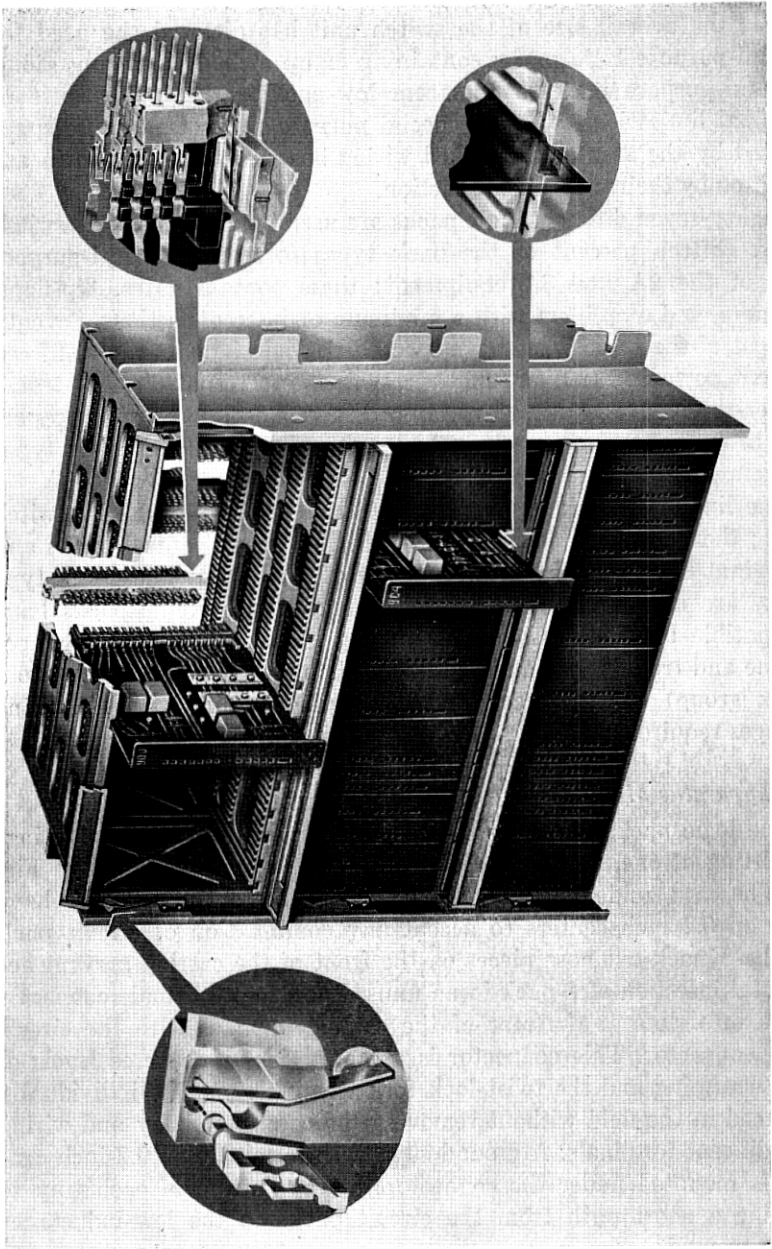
2A and 3A switch unit apparatus mounting.
